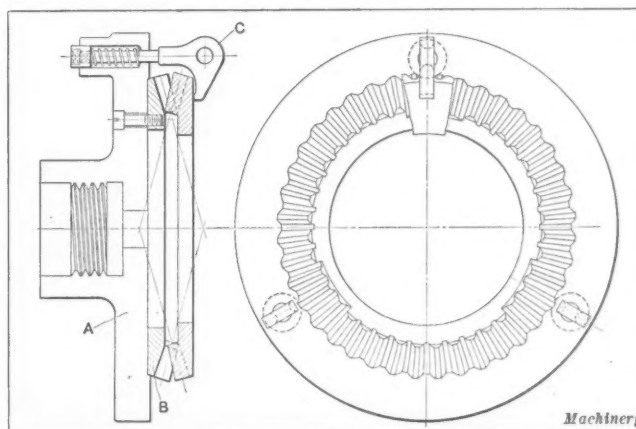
Fixture for holding Bevel Ring Gears having a Master Gear against which Work is clamped
